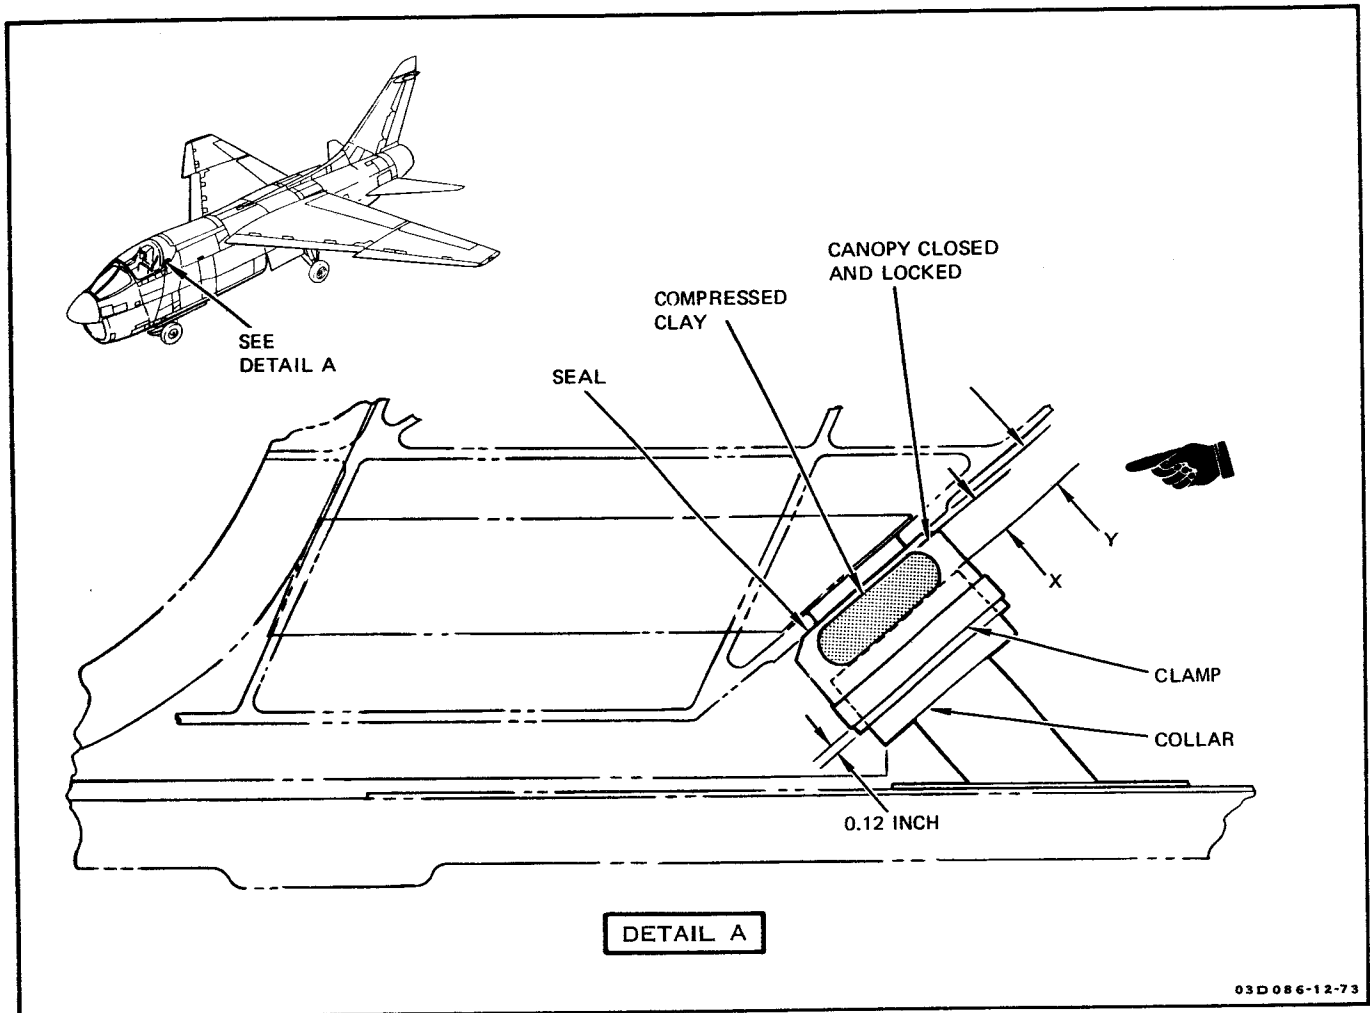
Canopy Rail Air Inlet Seal Removal and Installation
